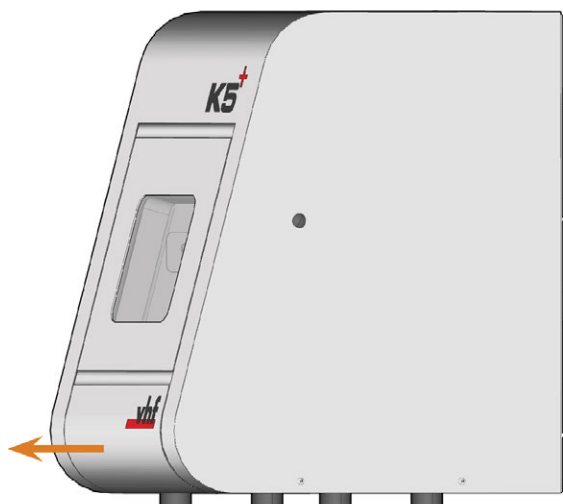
OPENING THE ACCESSORIES CONTAINER
